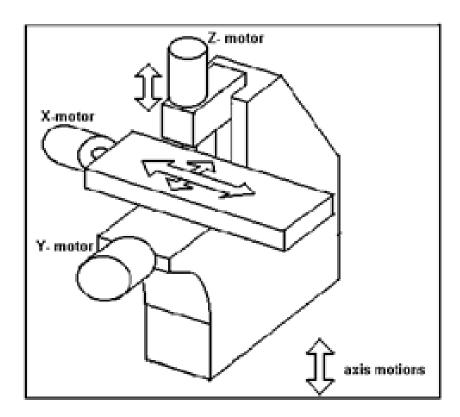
CNC machine tool with individual prime movers (motors) for all axes of motion
